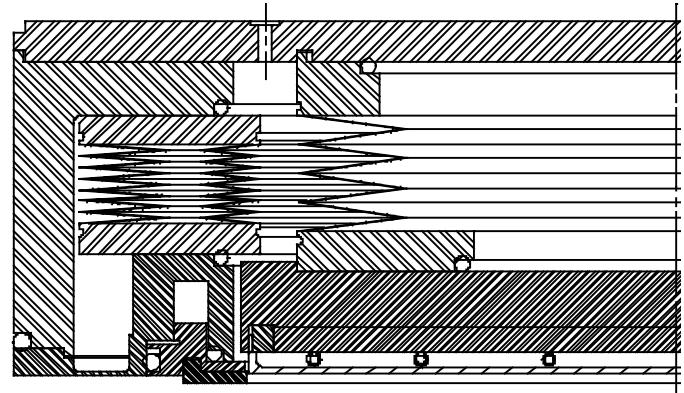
CAD drawing of the wafer carrier showing the integration of leaf level DPs.
